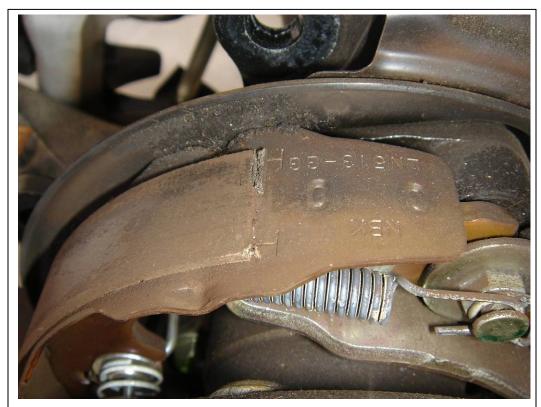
RHR park brake (Drum-In-Hat type) rear shoe and hardware, drum removed
